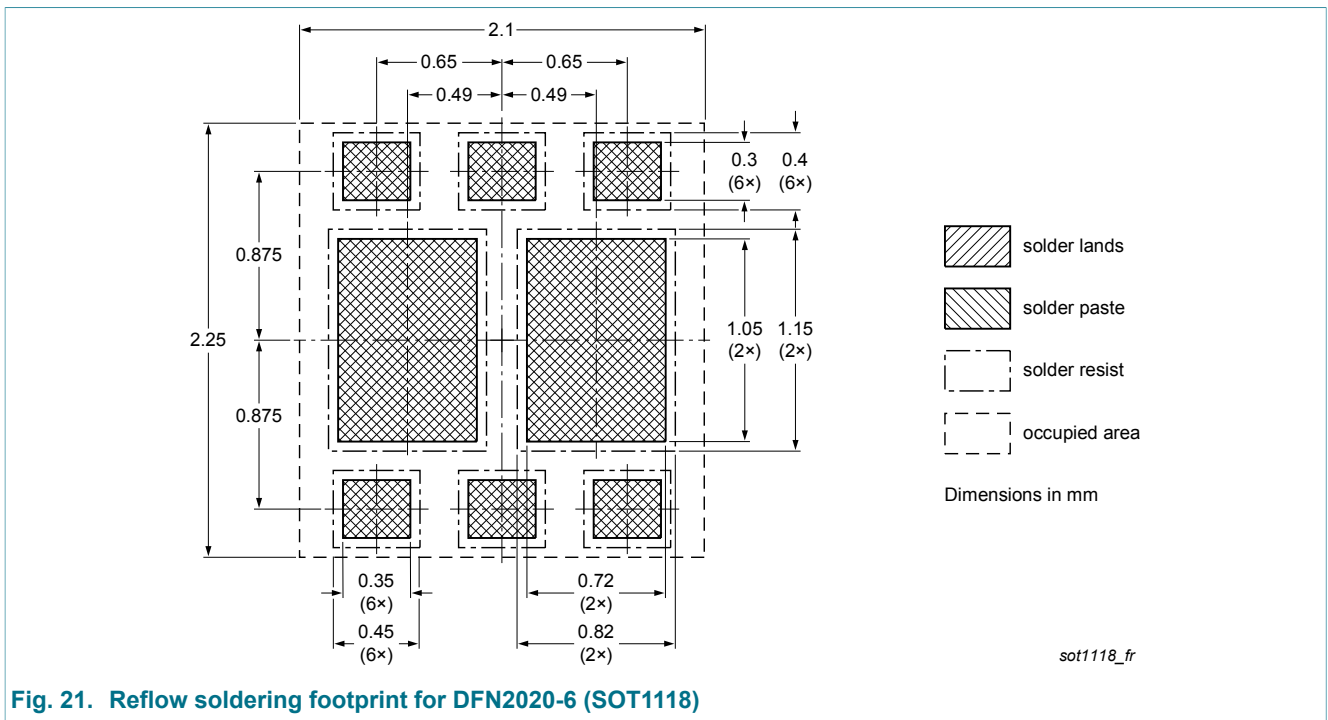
Reflow soldering footprint for DFN2020-6 (SOT1118)
